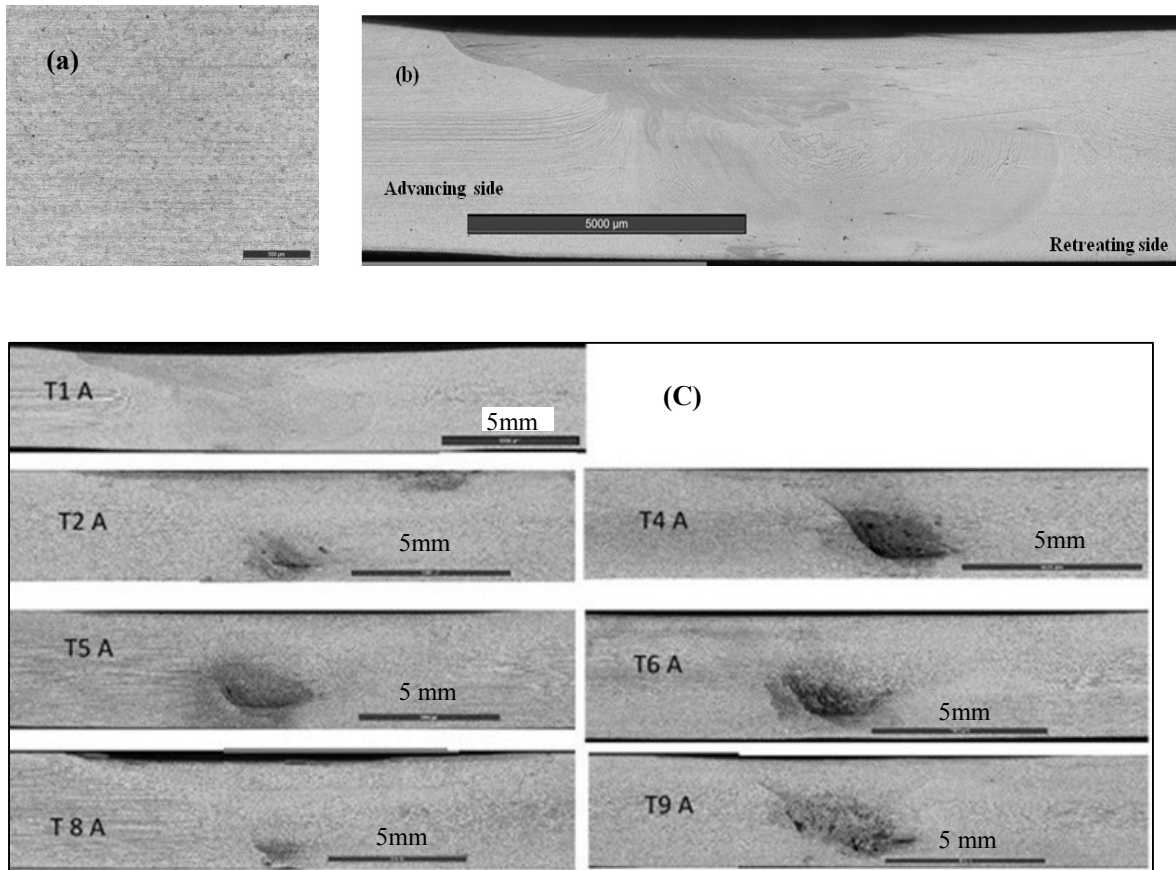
Optical microscope images at 5X (a) Base Material (b) Enlarged image of transverse section of a weld (c) Transverse section of few welded samples. “A” denotes the advancing side.
